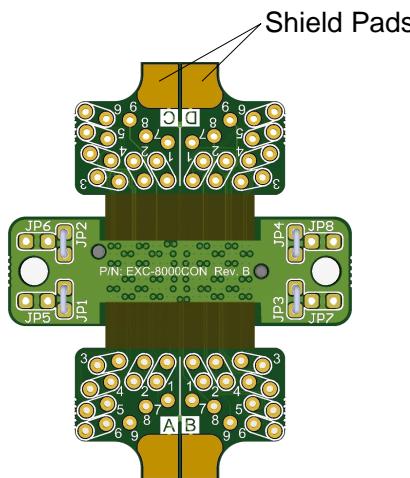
EXC-8000CON Assembly – Rear View with Soldering Holes
